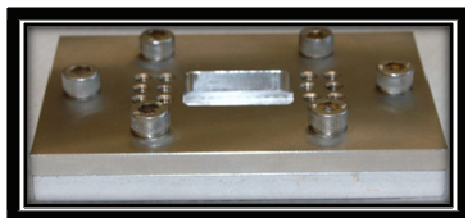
Microchip holder with Aluminum bottom machined at the SFU science technical centre.
